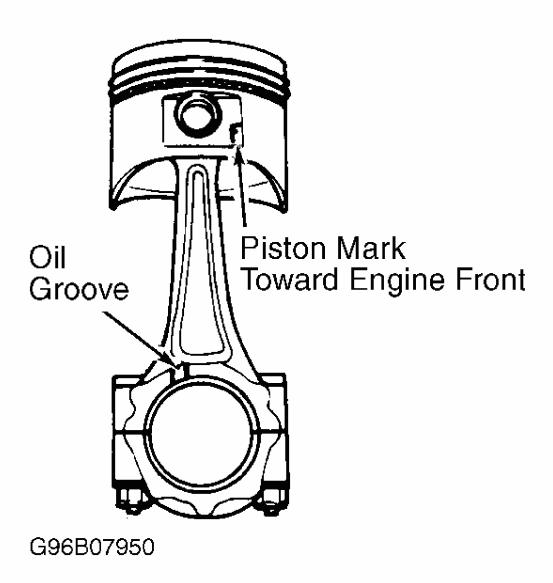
Installing Piston & Connecting Rod Assembly Courtesy of MAZDA MOTORS CORP.
